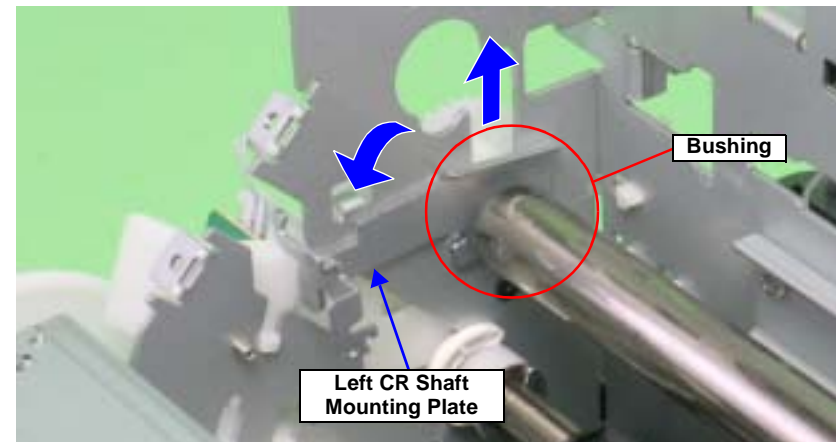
Removing the Left CR Shaft Mounting Plate
